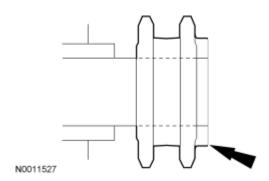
Positioning Crankshaft Using Crankshaft Holding Tool Courtesy of FORD MOTOR CO.
